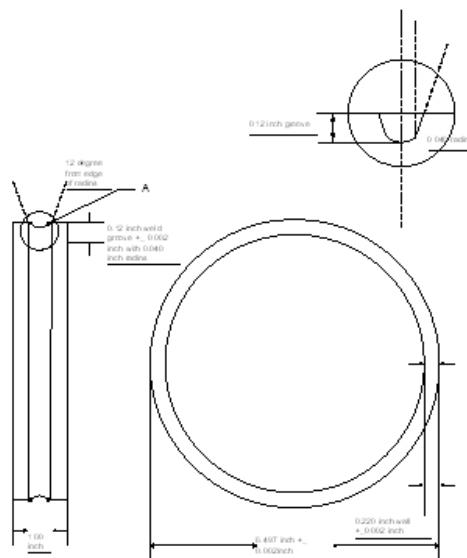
, Geometrical regulation of LANL aluminum cylinder
